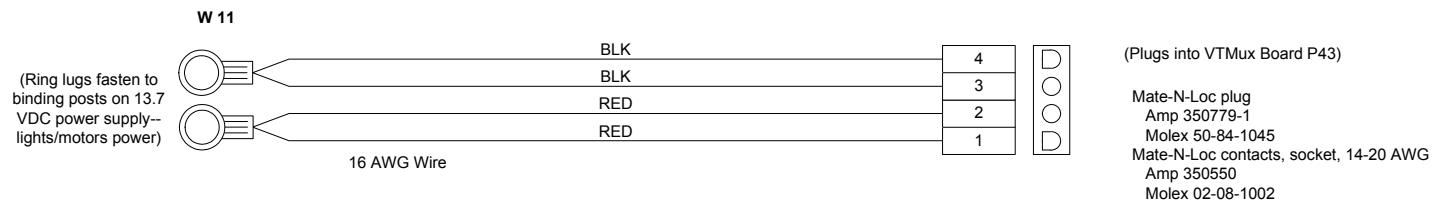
13.7 VDC POWER SUPPLY TO 8051 VTMUX BOARD P43
